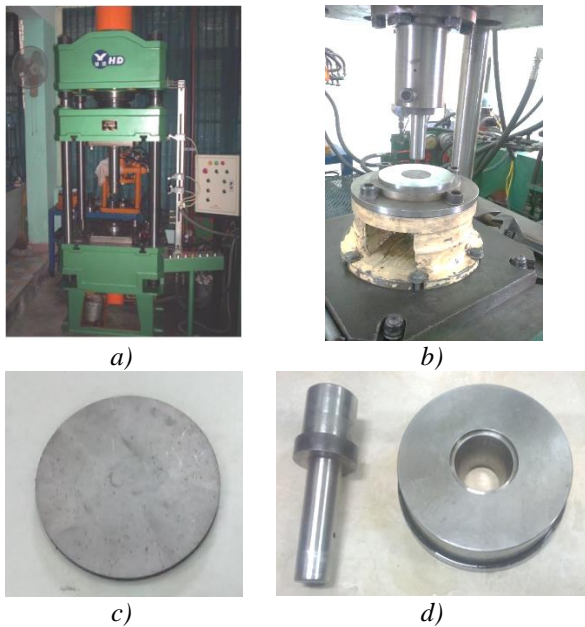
Equipment and experimental instruments. a) Hydraulic presses YH32-100T; b) Tools;c) Blank; d) Punch and die
